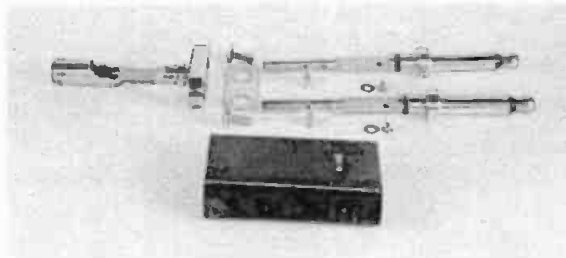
C. Exploded view of the parts of a Western Electric 241A double-circuit patch cord plug.
